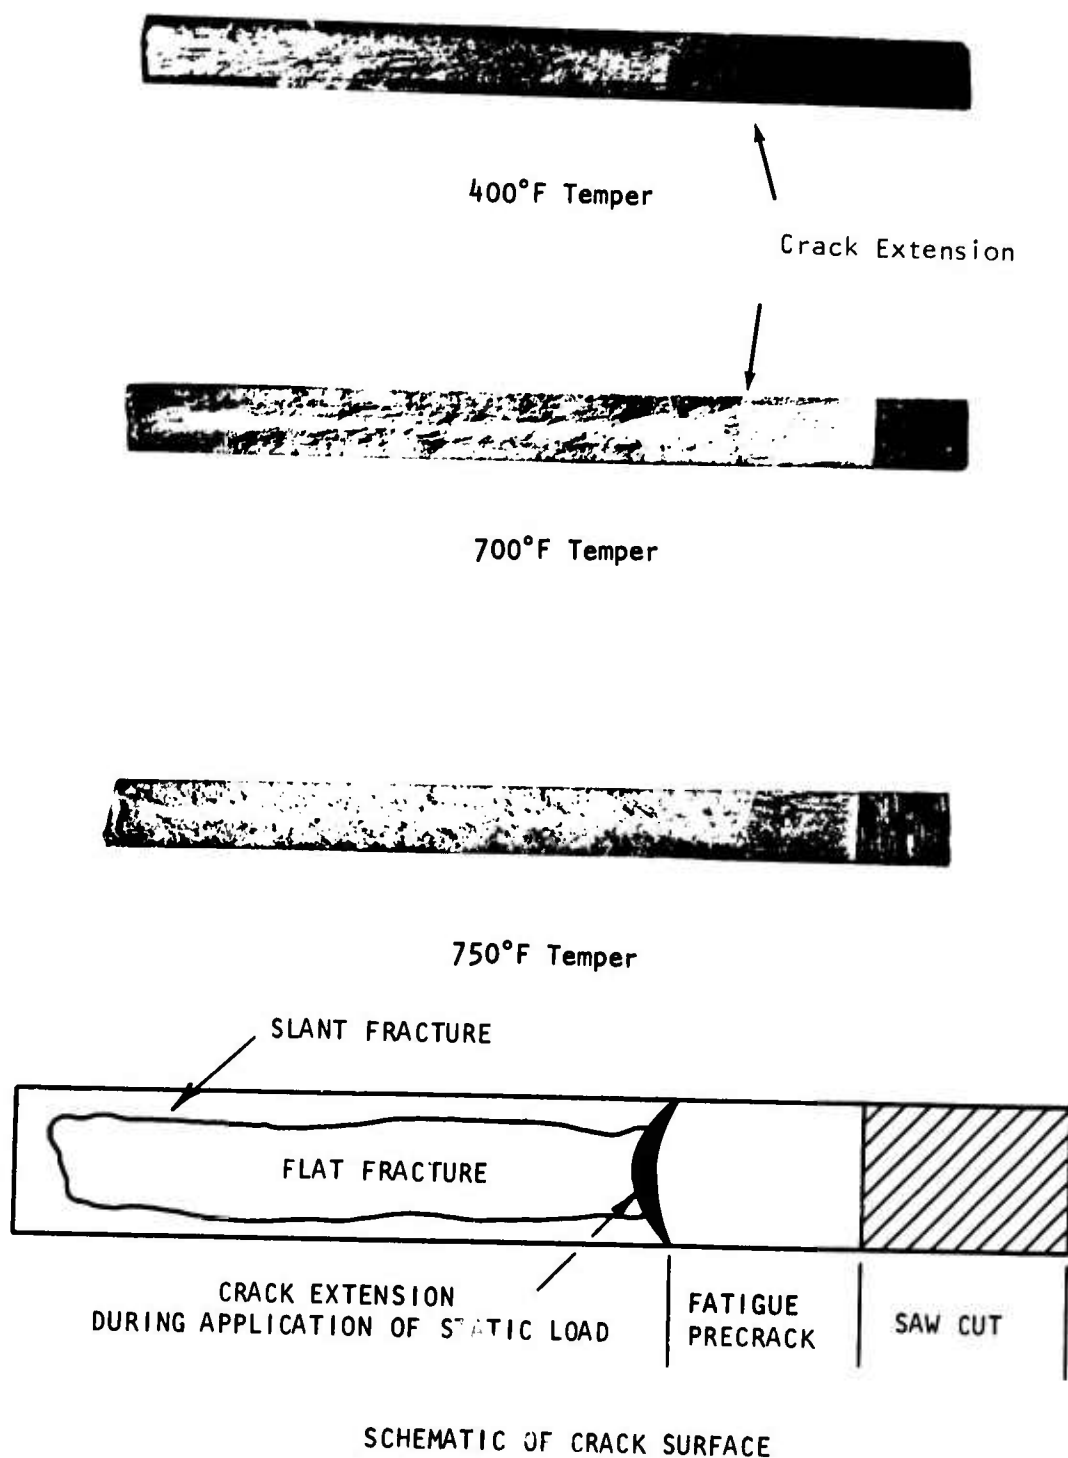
Schematic and Actual Crack Surfaces of 0.067" Thick Specimens Tested in Air Environment. Specimens Loaded to 60 ksi, Unloaded, Heat Treated 1 Hour at 600°F, and Reloaded to Failure.
